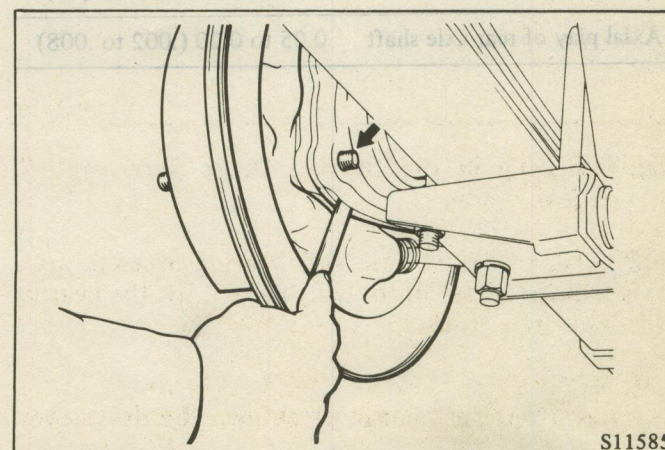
Measuring Bearing Case to Housing End Face Clearance
